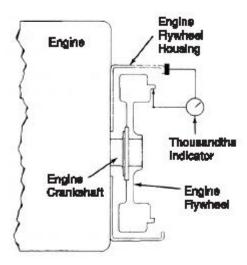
Checking the Flywheel Pilot Ring Bore Eccentricity
